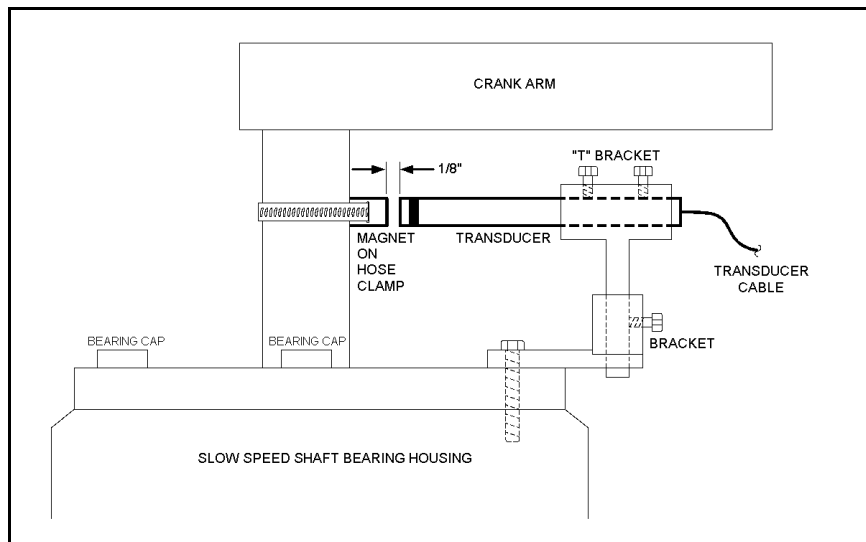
Round Magnet Mounted on Low Speed Shaft of Gearbox
